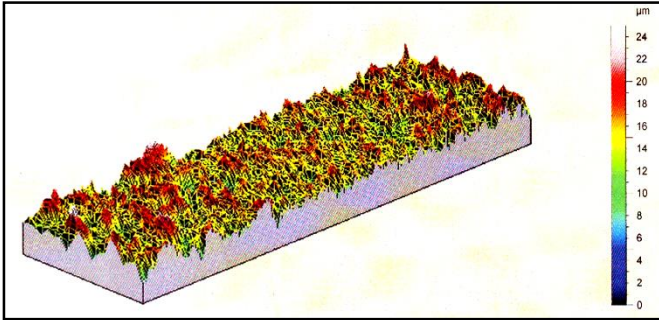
View of the 3D surface image of the iron-copper detail after infiltration.
